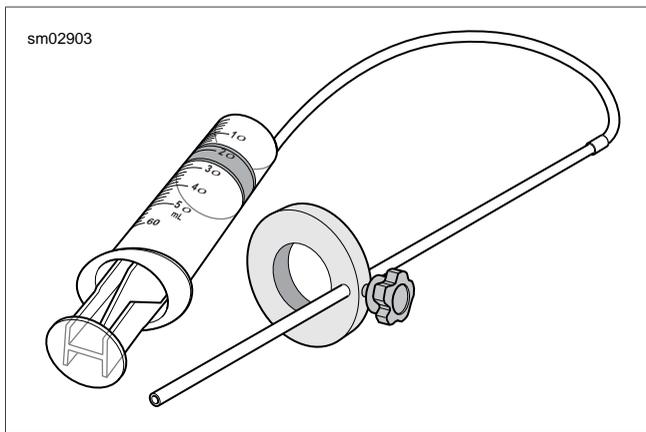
Fork Oil level Gauge (HD-59000B)
